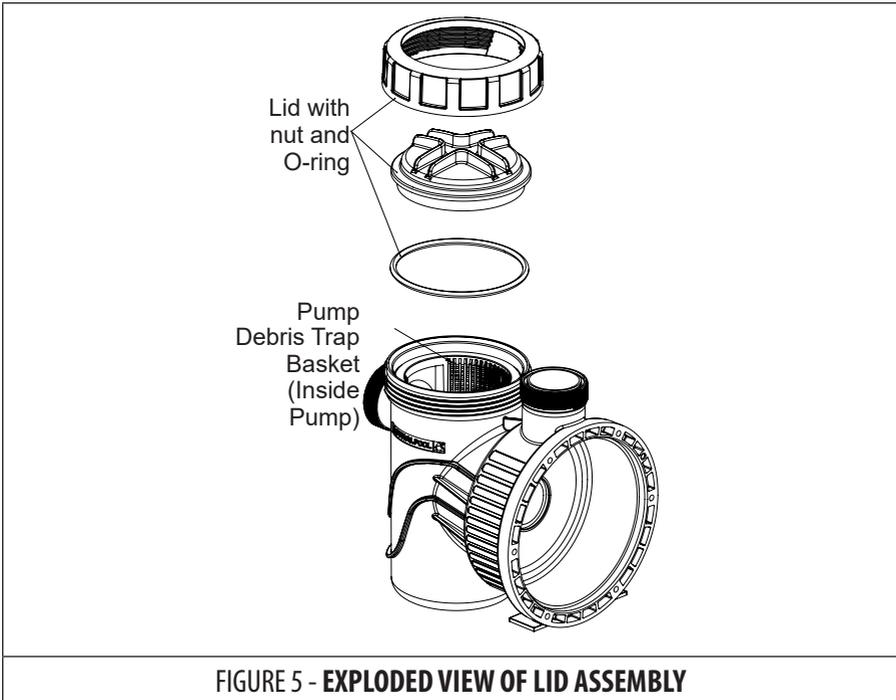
EXPLODED VIEW OF LID ASSEMBLY
